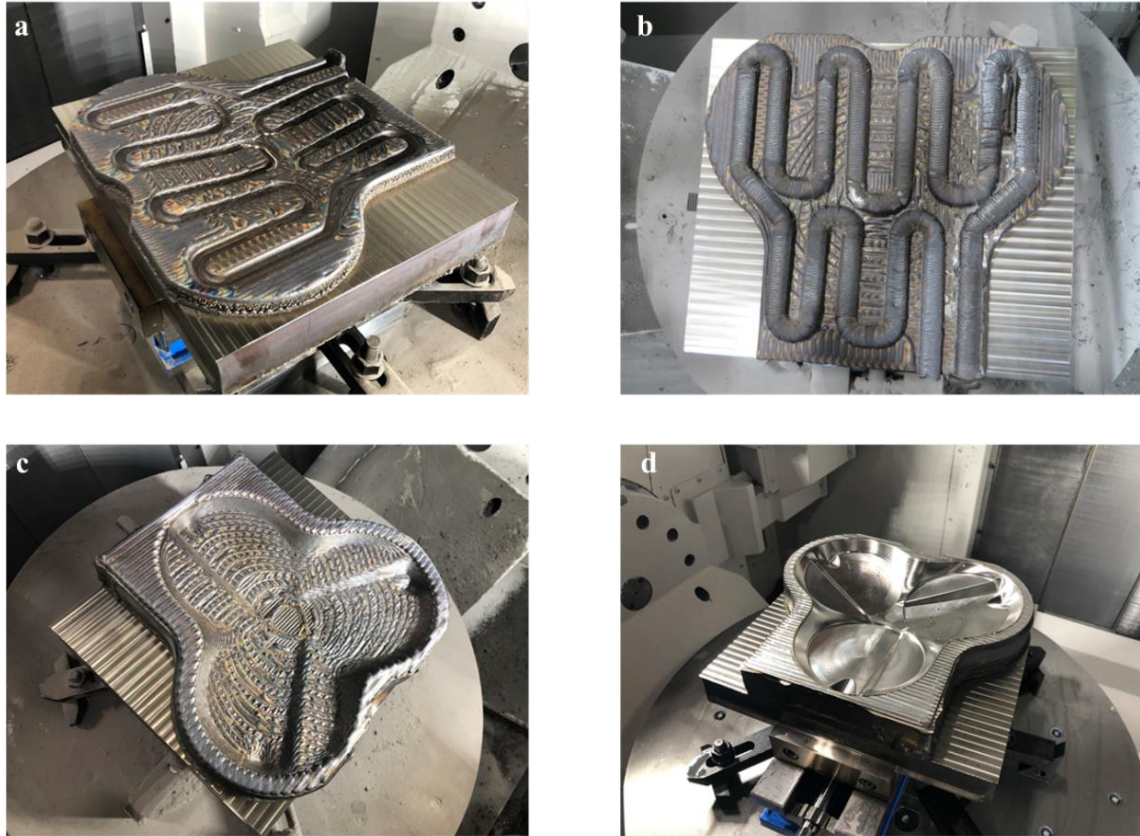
A mold manufactured with conformal cooling channels on a hybrid system by (a) machining the lower half of the channels, (b) using DED to cover the channels, (c) using DED to print the rest of the mold, and (d) machining the mold to a surface finish acceptable for molding (image courtesy of ORNL).
